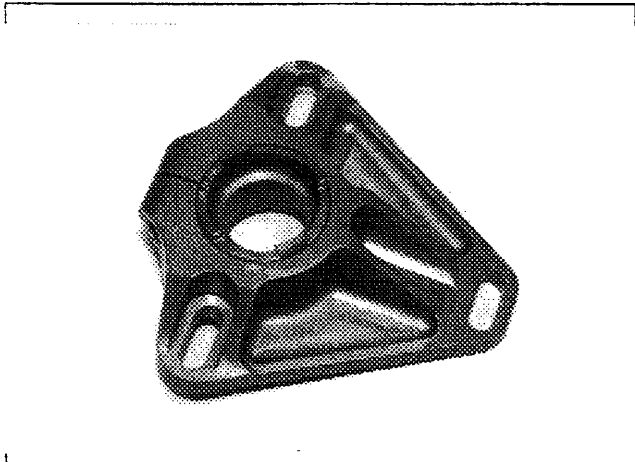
REAR REINFORCED TOP MOUNTING PLATES
